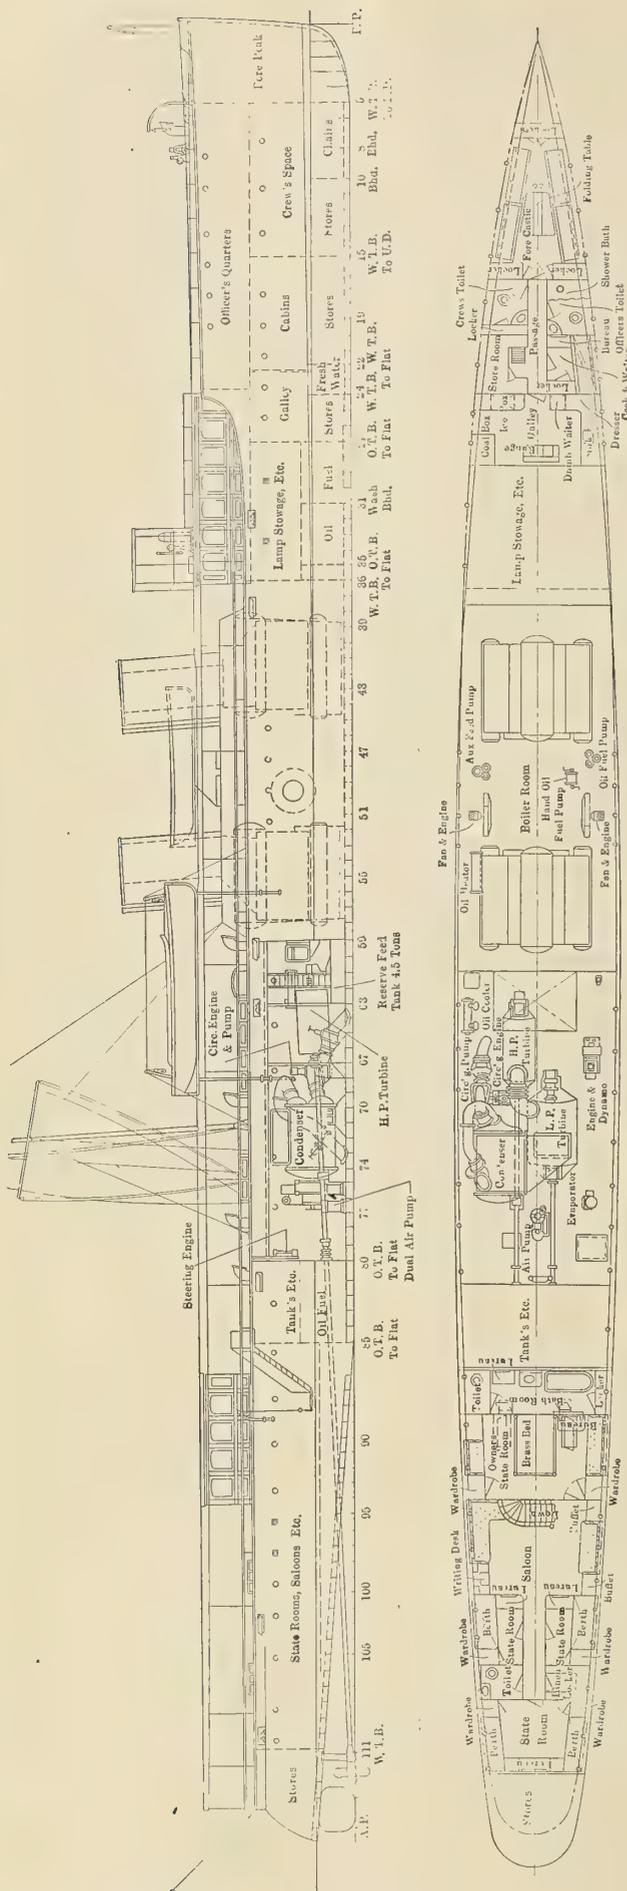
PROFILE AND DECK PLAN OF THE WINCHESTER
